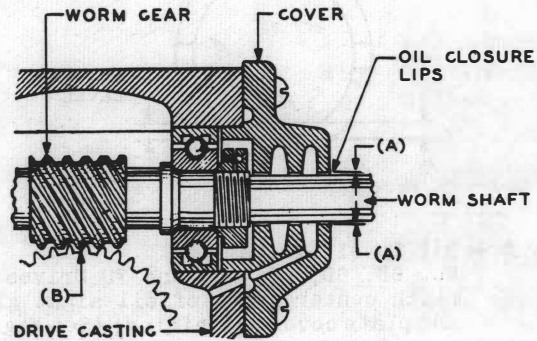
Clearance Between Shaft and Oil Closure Lips
